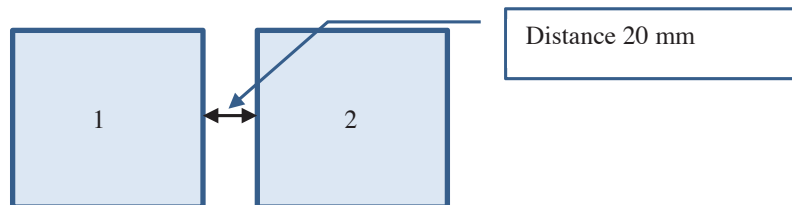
Schematic of the parts cut out, 50x50 mm.
